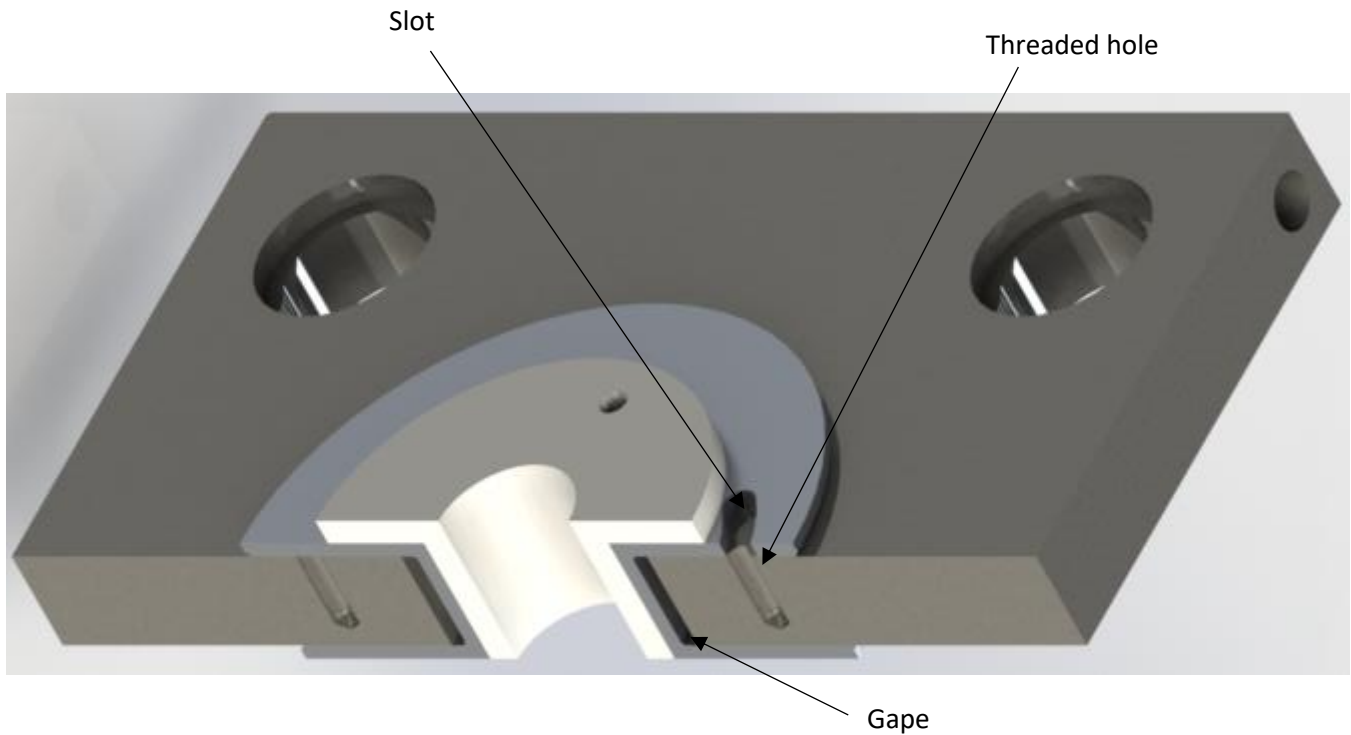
A schematic diagram showing section view of the front/ middle plate sub-assembly.
